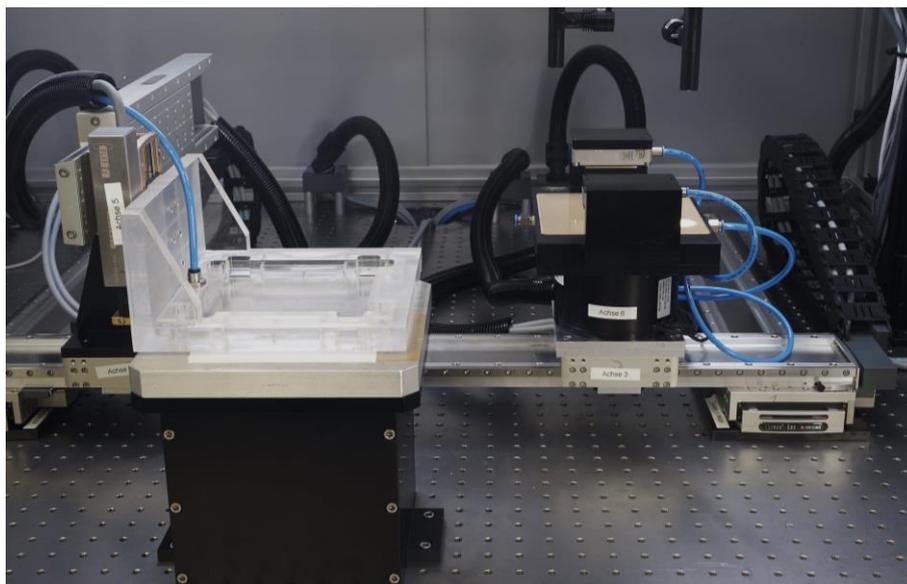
Final setup of alignment & laser welding module; vacuum gripper (left) and welding stage (right)
